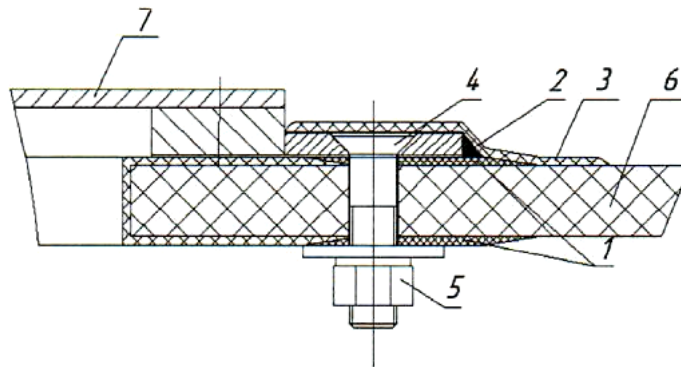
Tank manhole assembly with metal cover:
